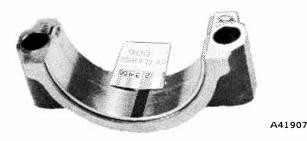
A-37 Bearing Clearance Measurement with Plastigage
